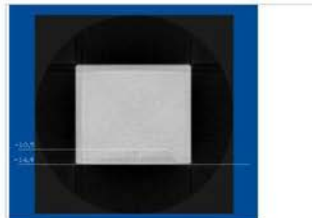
CT-slice #29 (z=110.16 mm) of test block P28 (N 220 AD U TS 3), crack depth: 4.4 mm (w/ 2 pixel = 0.24 mm), 14.9% of weld thickness
